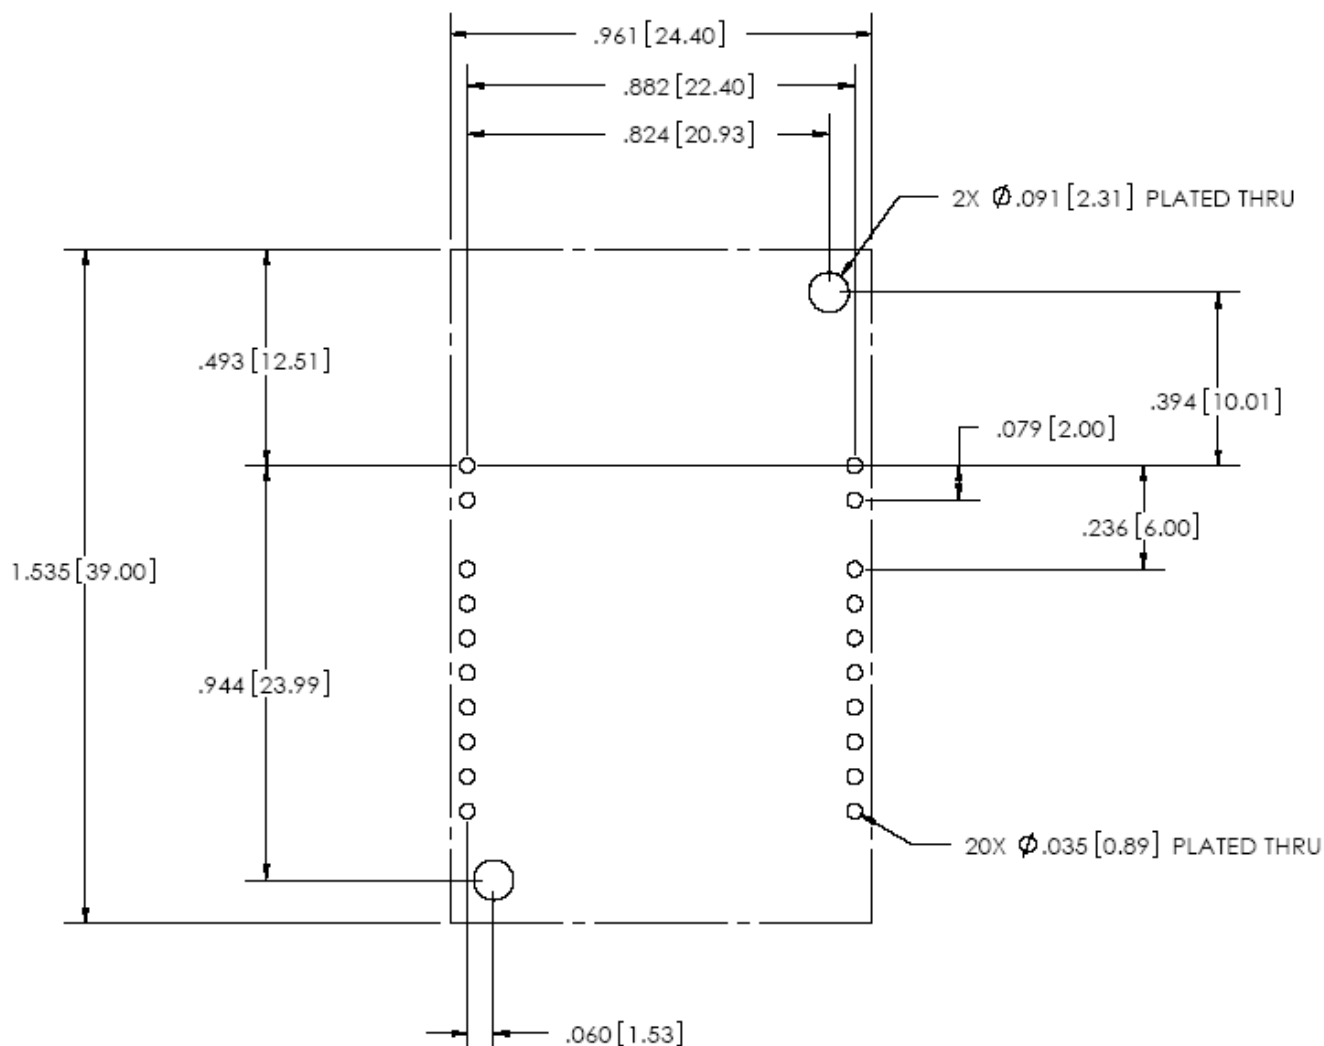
M2135-1/M2030-1 Mote Footprint—Mechanical drawing
